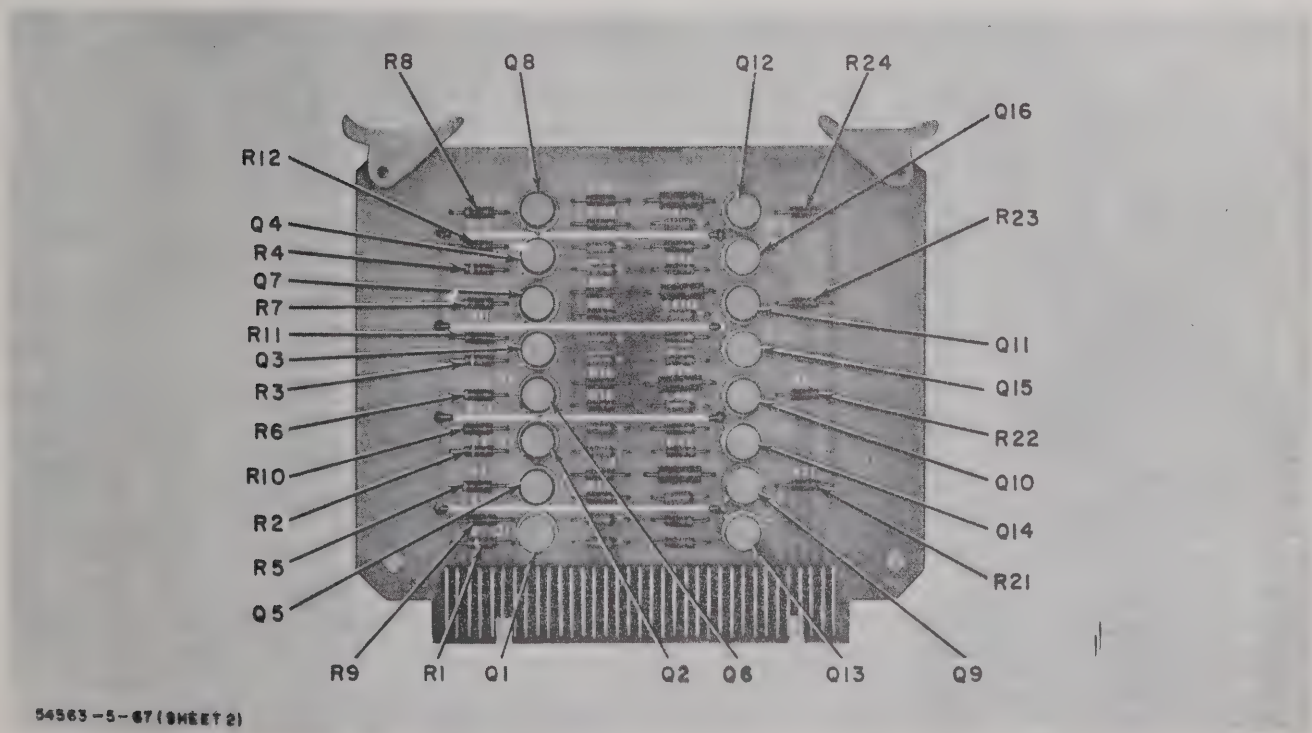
Light Drivers Printed Wiring Board A2, ECI 61-00943-001, Part Location (Sheet 2 of 2)
